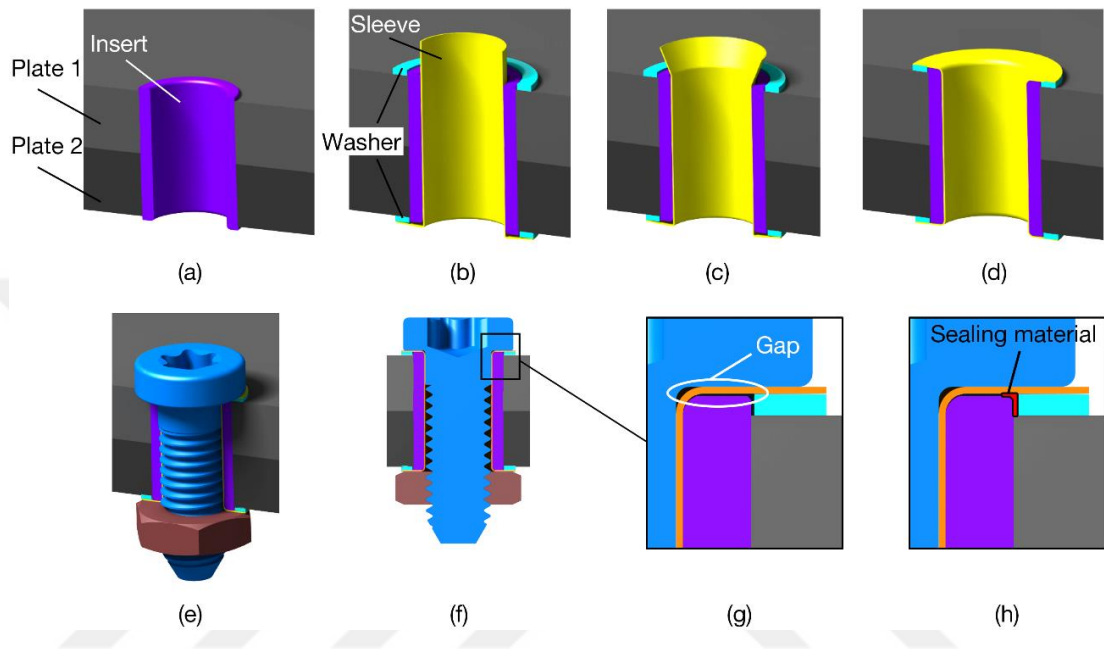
Proposed model, assembly components: insert (a), washers and sleeve (b), pre-forming sleeve (c), formed sleeve (d), bolt-nut configuration over the assembly (e), the cross-section of final assembly (f), detailed view of bolt seating region (g), an optional sealing material (h)
